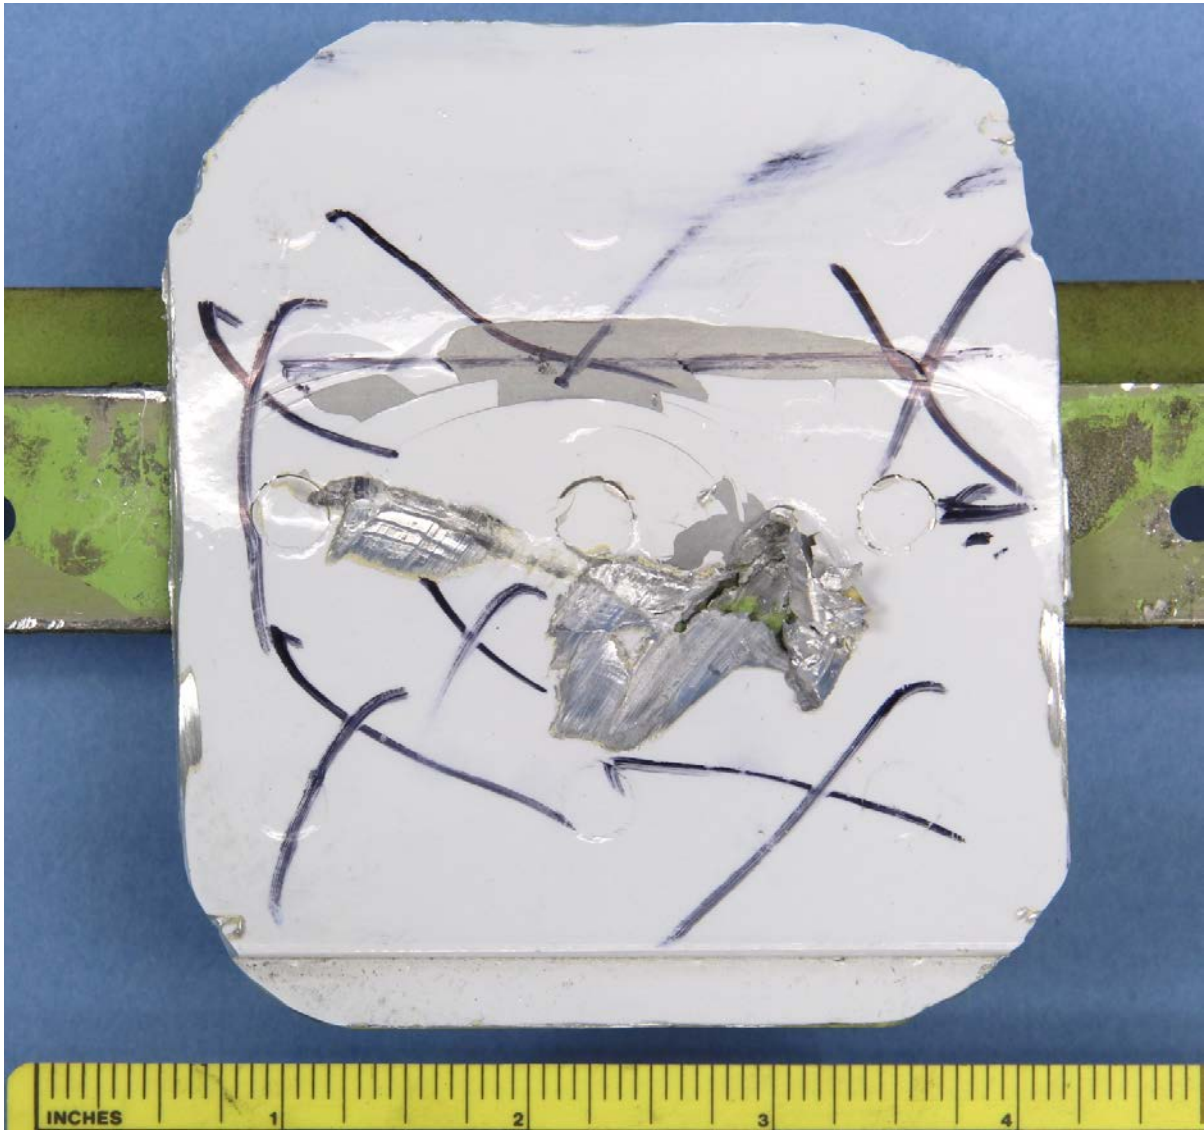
Close-up photo of the piece of fuselage still attached to the stringer. Impact marks were visible on the painted external surface of the piece.
